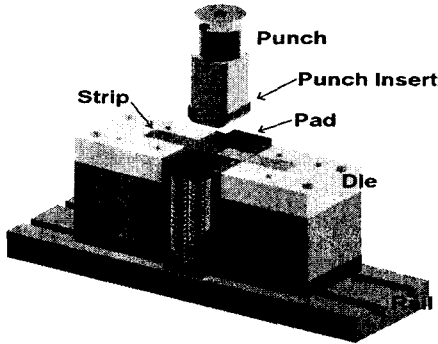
Experimental apparatus of U-bending test for the tailor-welded strips
